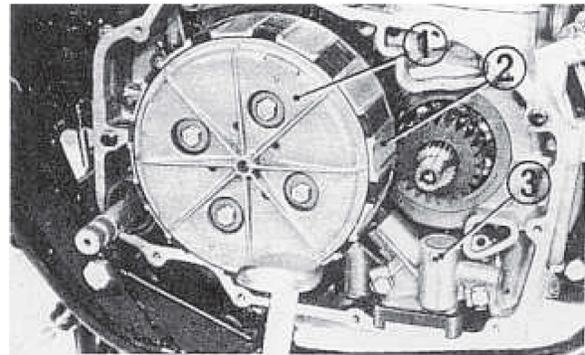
(1) Clutch pressure plate (3) Oil pump
